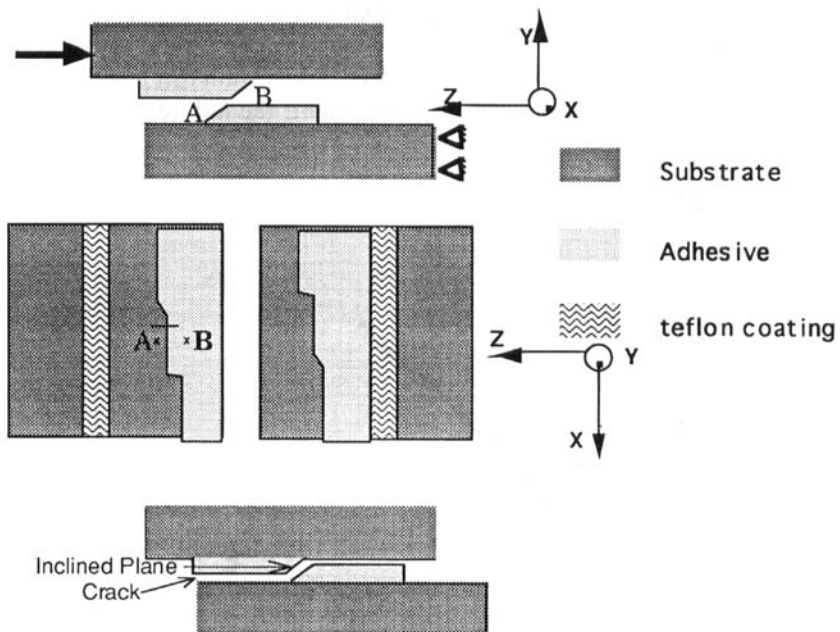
Schematic illustration of a fracture surface showing that the crack passes from one interface to the other, creating a small zone of cohesive fracture in the adhesive.
